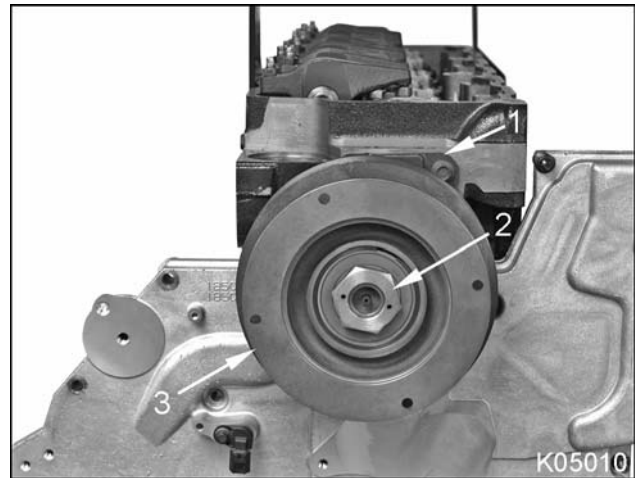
Fan mounting bracket, DriveMaster® (typical)
